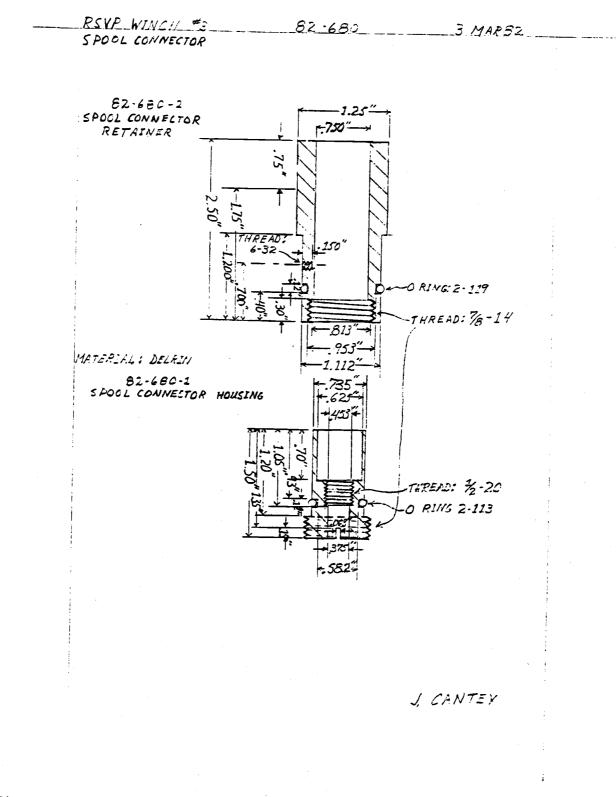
Spool connector retainer and housing (dwg no. 82-680).
